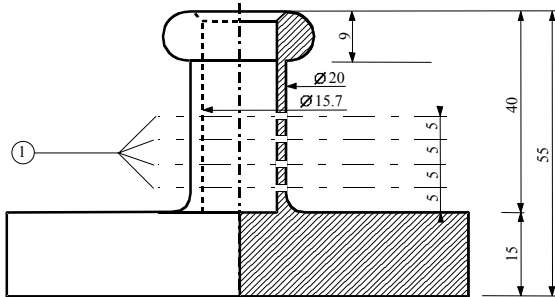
Hollow bronze cylinder, closed at one end; Plan and cut dimensions in mm
